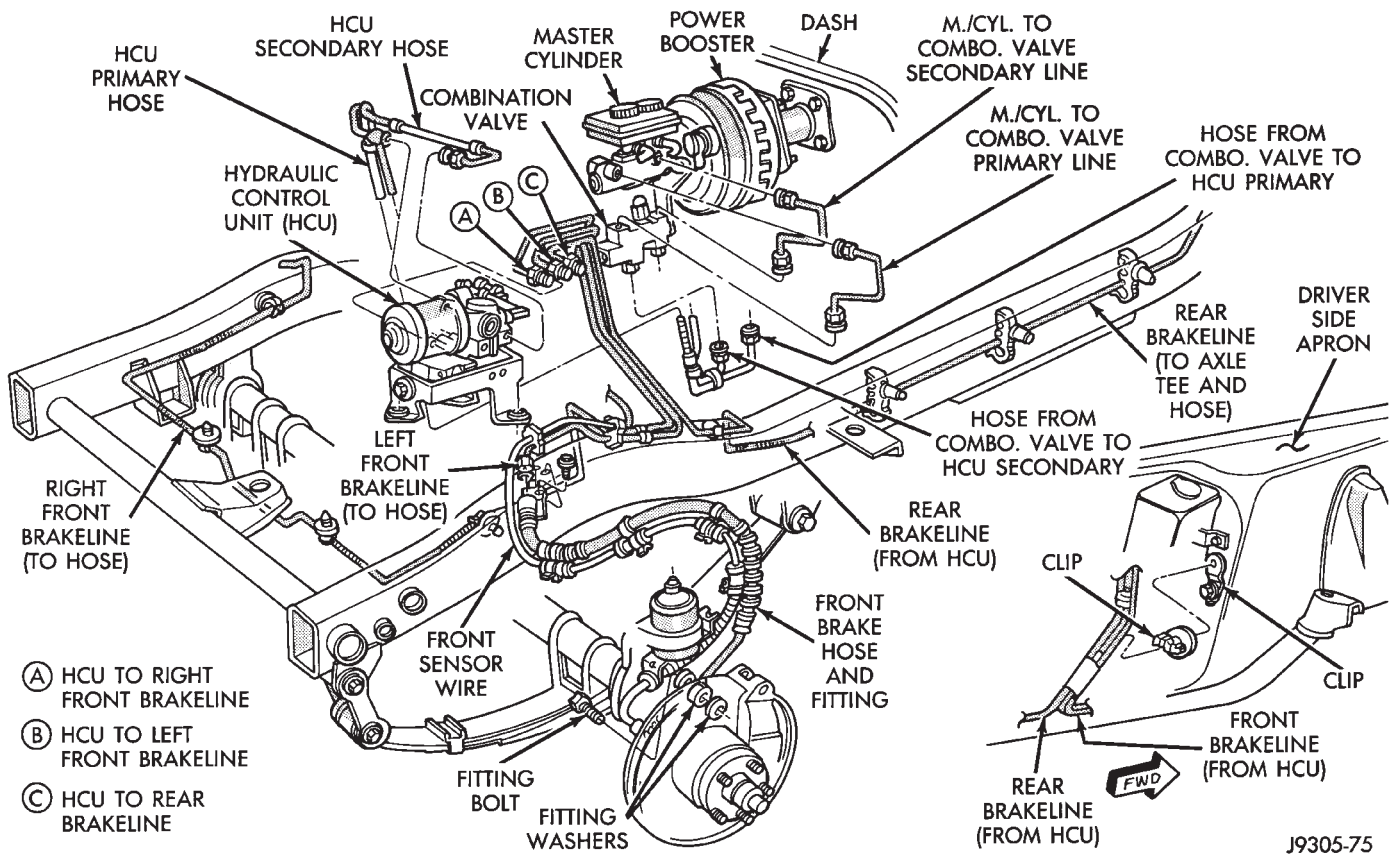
Front Brakeline Routing (YJ With ABS Brakes)
